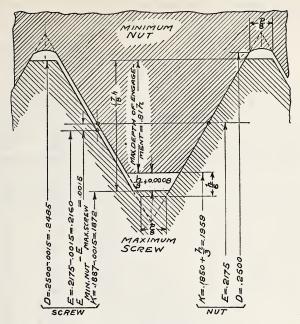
Illustration of tightest condition for class 1 fit, one-fourth inch, 20 threads.
